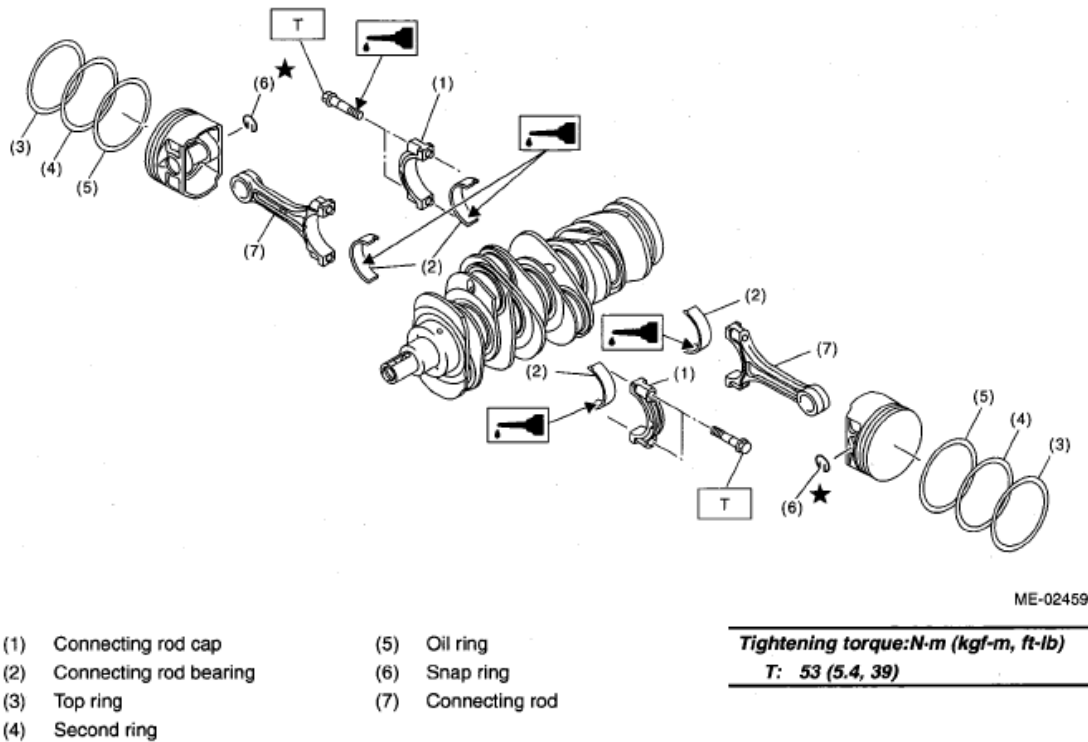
Identifying Piston And Connecting Rod Assembly With Torque Specification
